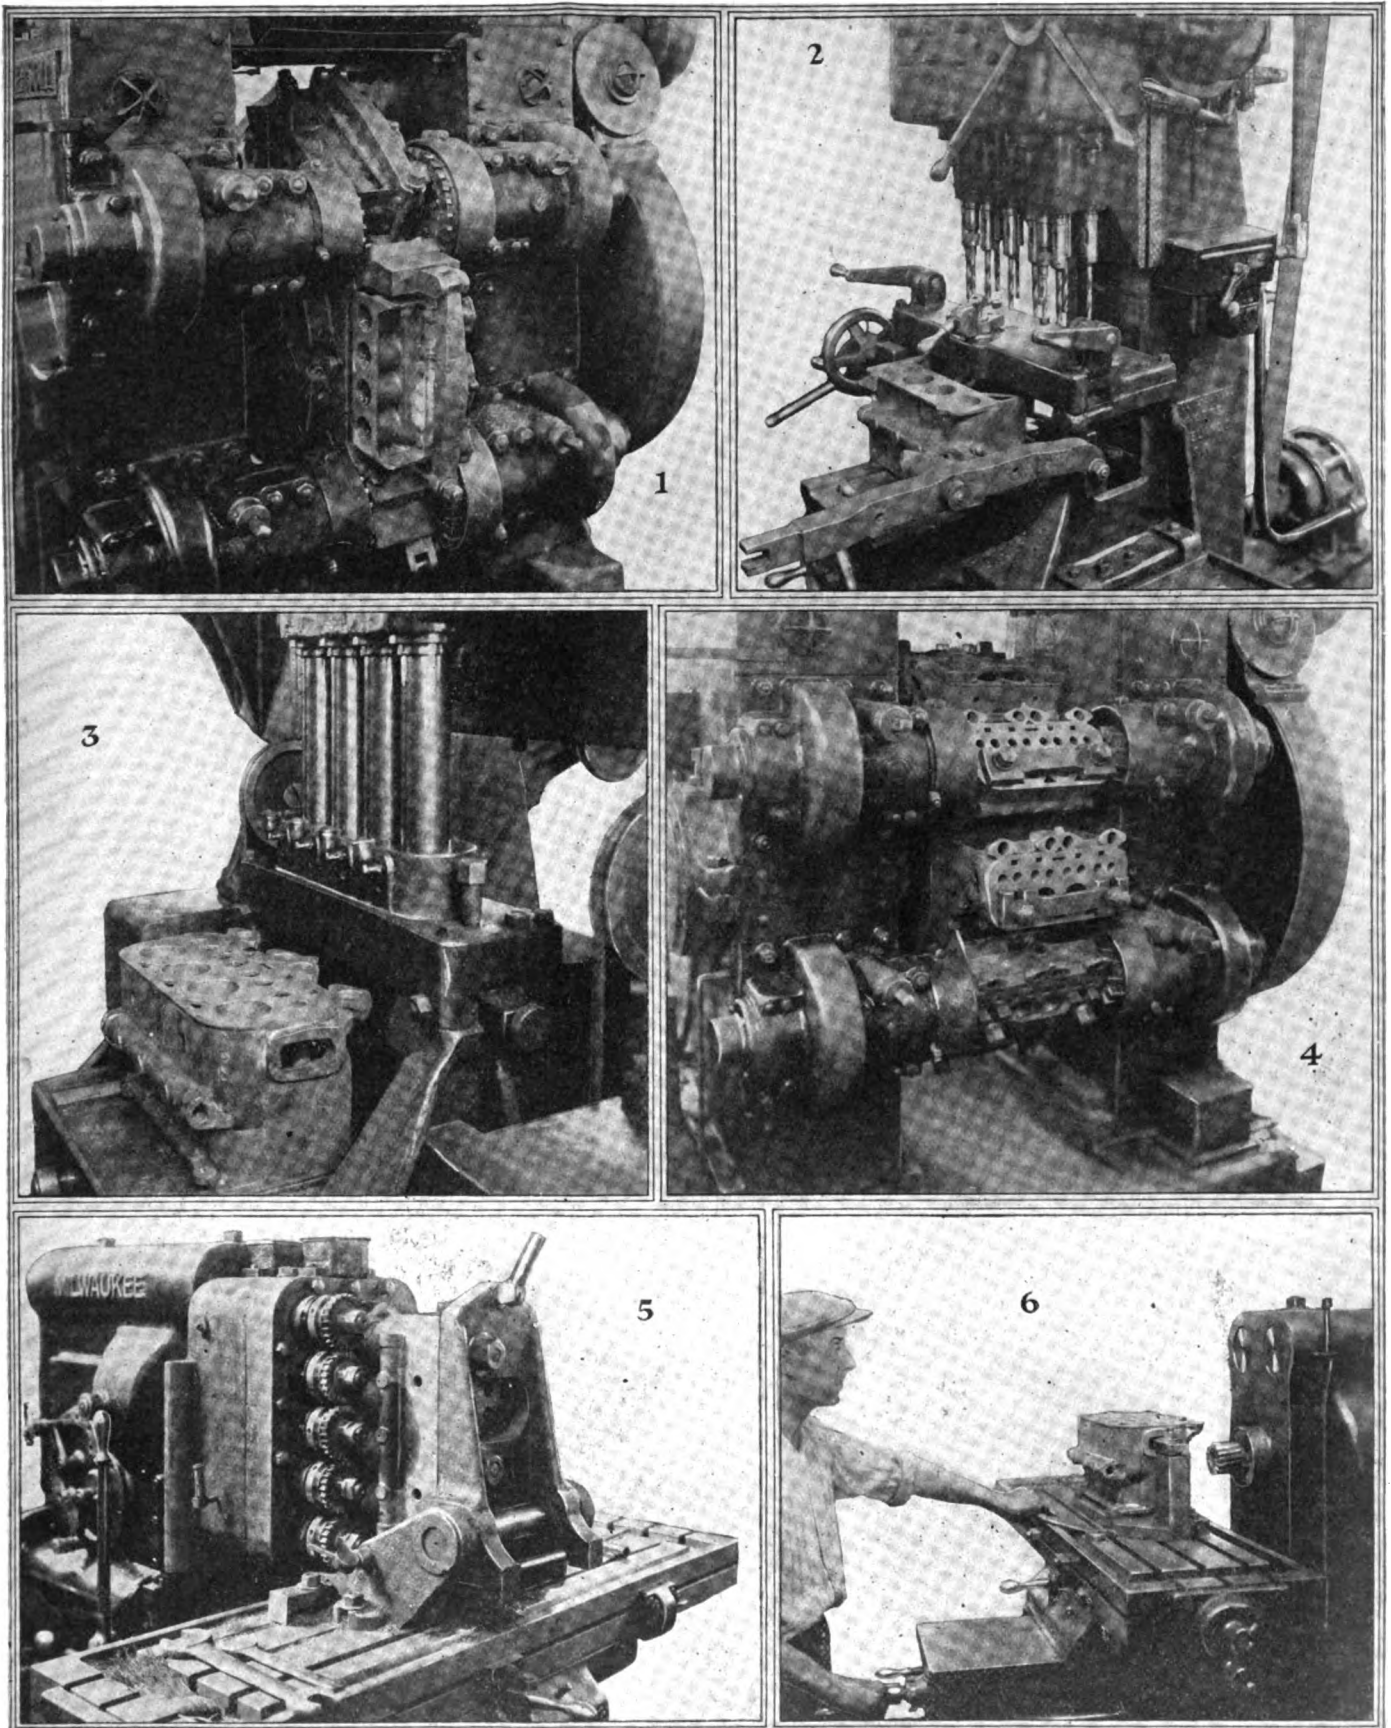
Ingersoll continuous rotary miller which takes rough and finish cut from top and bottom face of block. Fig. 2—Foote-Burt multiple spindle drill with twelve spindles which mills bottom flange and drills and reams the two dowel holes for locating the crankcase on the cylinder block. These dowel holes are used for locating practically all of the machine work on the block. The dowel spindles may be noted by the Magic quick-detachable chuck used for changing over to the reamers for these holes. Fig. 3—Foote-Burt machine for rough boring cylinder block. This machine takes about  $\frac{1}{8}$  in. off the bore and operates at the rate of 20 blocks per hr. Fig. 4—Ingersoll rotary miller for milling both ends of the block. Miller has both rough and finish cutters. Fig. 5—Milwaukee 3B miller which mills the intake manifold flange on all cylinder blocks. Fig. 6—Milwaukee miller for milling eight bolt hole faces and spot facing two bolt hole faces on Olds blocks. Note location on these operations, which is from dowel holes in bottom of blocks, the work being secured by clamps in the water outlet hole
